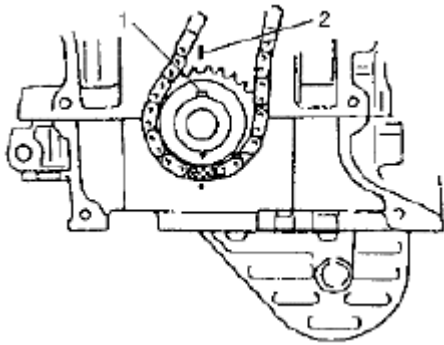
Identifying Crankshaft Timing Sprocket Key With Timing Mark
